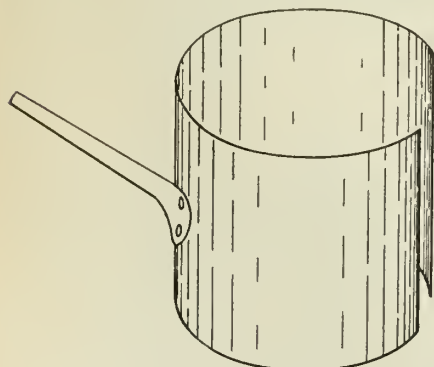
SHEET METAL HOPPER WHICH HOLDS THE STOCK DURING MELTING PROCESS.
